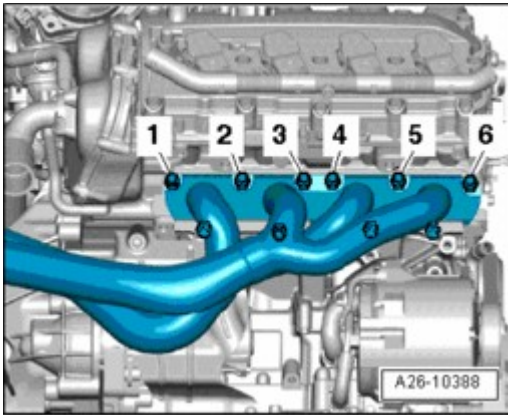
Removing/Installing Nuts And Right Exhaust Manifold
